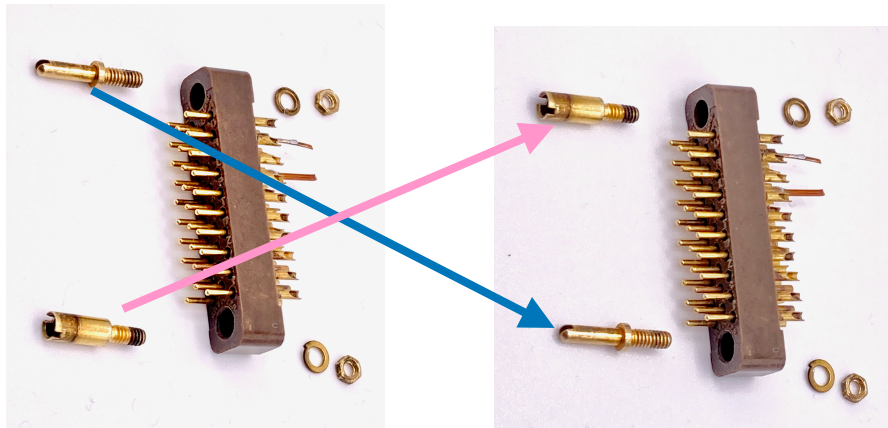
Incorrectly assembled plug on patch cable. Guide pins switched by mistake. The plug will still fit into the socket on control panel if it is turned upside down.
